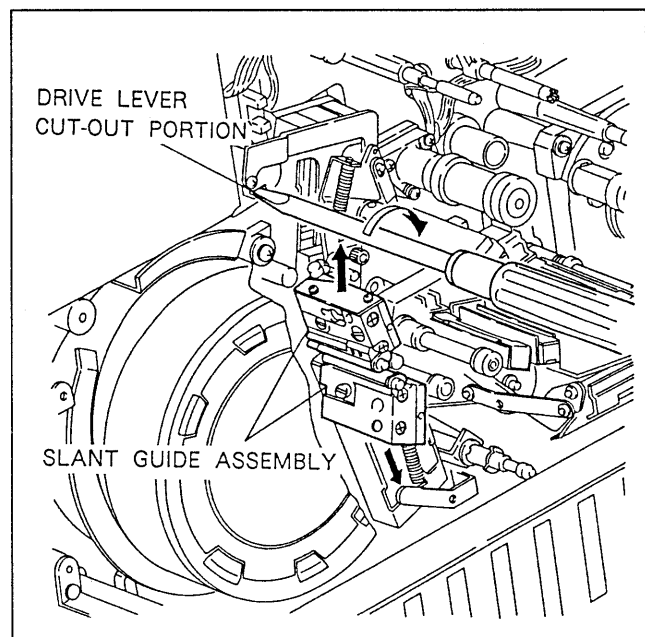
Movement of Entrance/Exit Slant Guides
